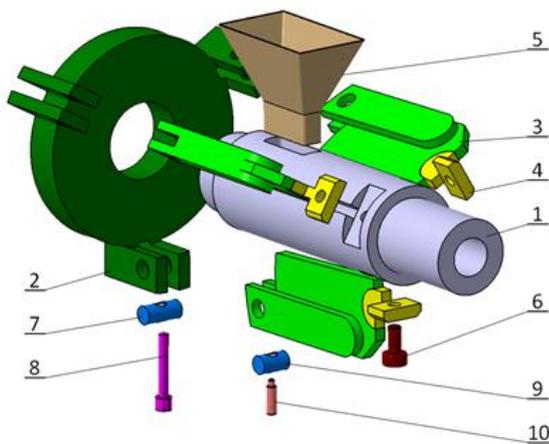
Concept model No 1. Exploded view: 1 – main sleeve, 2 – fixing plate, 3 – moving segment, 4 – hinge, 5 – hopper, 6 – fixing screw, 7 – front pivot, 8 – adjusting screw, 9 – back pivot, 10 – adjusting metal bolt
